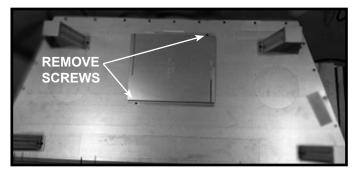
Remove Elbow Heat Shield by Removing Two Screws
